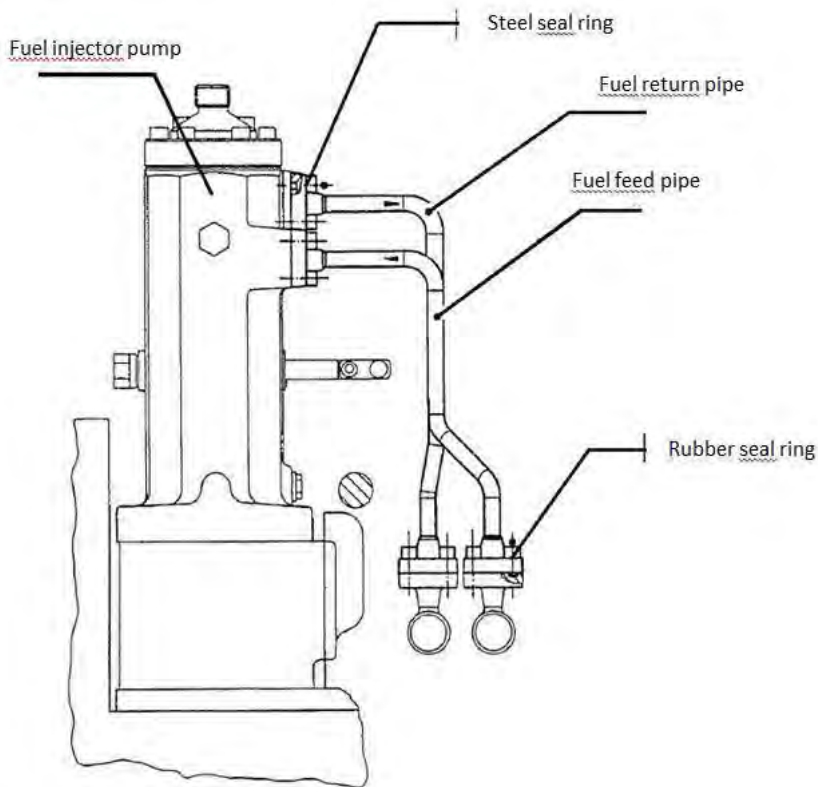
Schematic drawing of a fuel oil injector pump. According to the engine manufacturer's specifications, steel seal rings shall be used on the upper flanges while rubber seal rings shall be used on the lower flanges.
